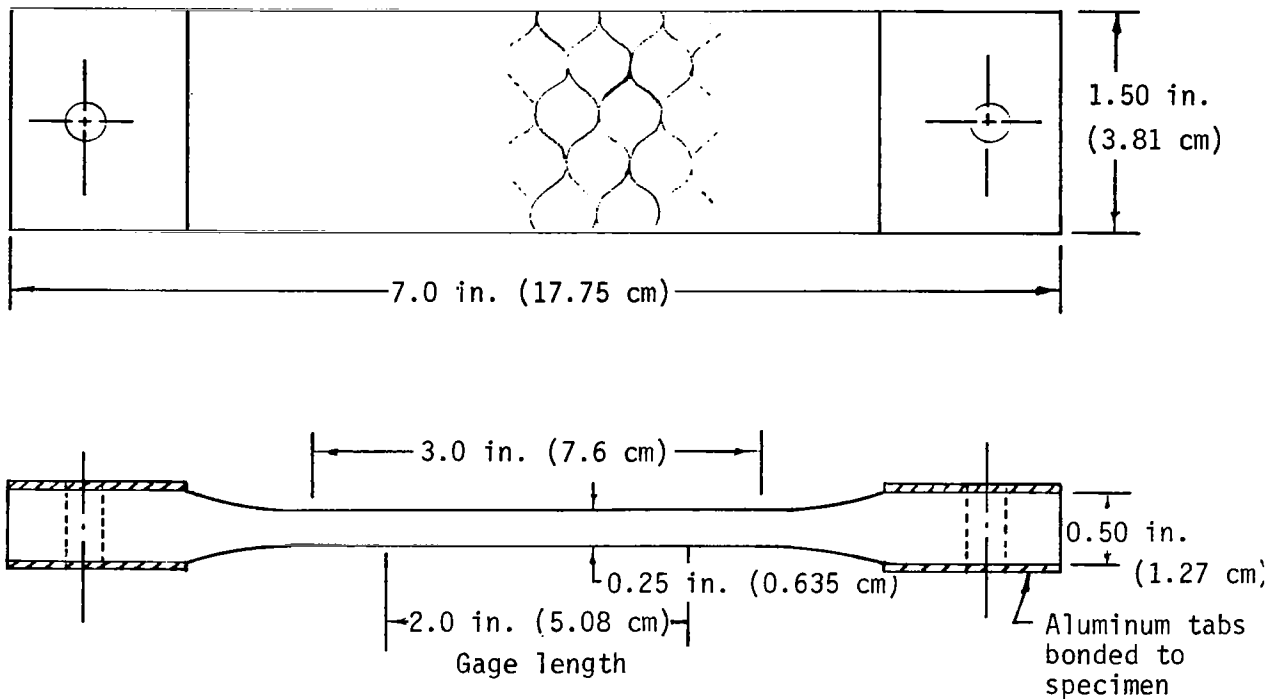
Tensile Specimen, Ablator in Honeycomb
